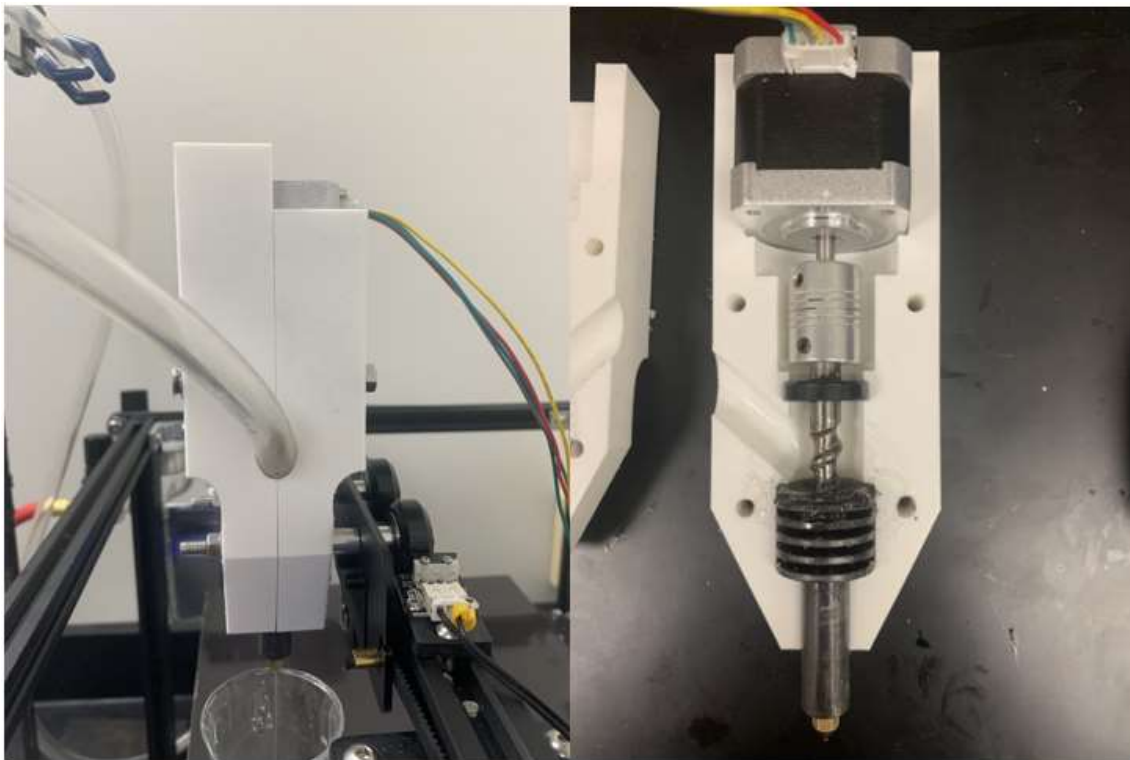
Assembled (left) and cross section (right) of assembled printhead with internal components.
